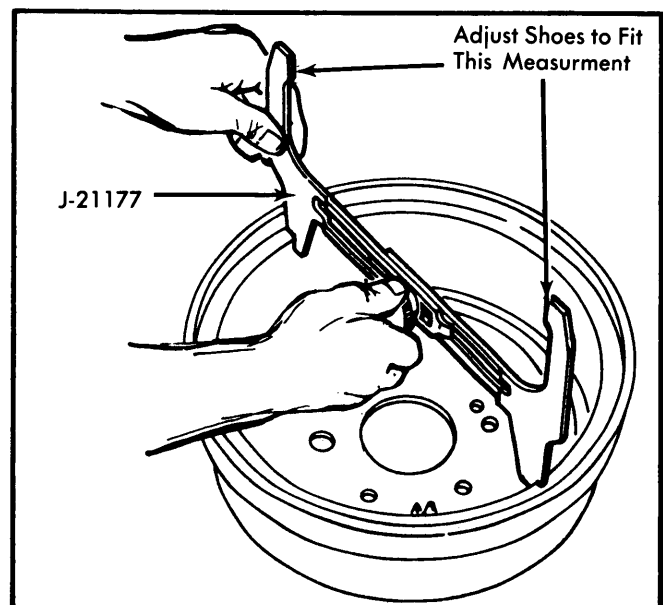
Measuring Drum Inside Diameter for Brake Shoe Clearance
